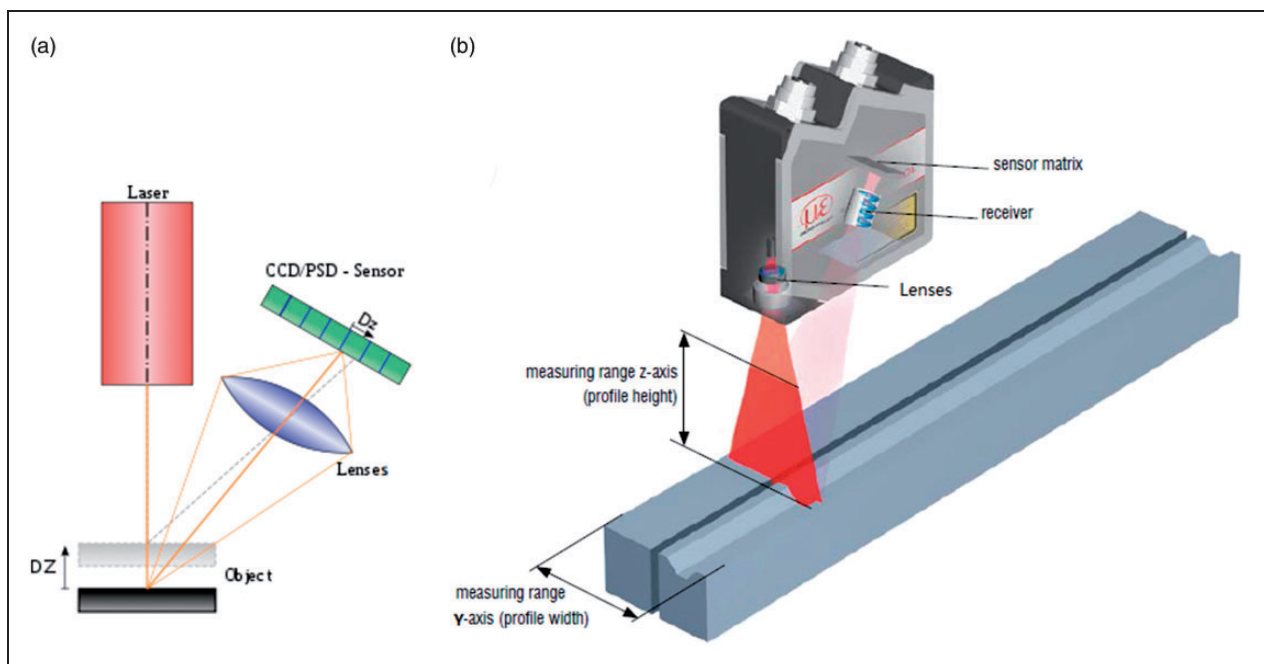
Measuring principle of the laser: (a) laser triangulation; (b) scanCONTROL 2D laser scanner.
